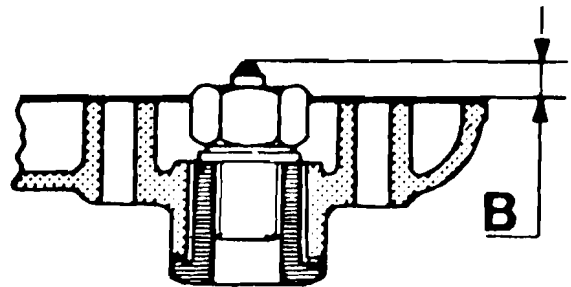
Solex carburettor float adjusting diaphragm (Sec 12)
